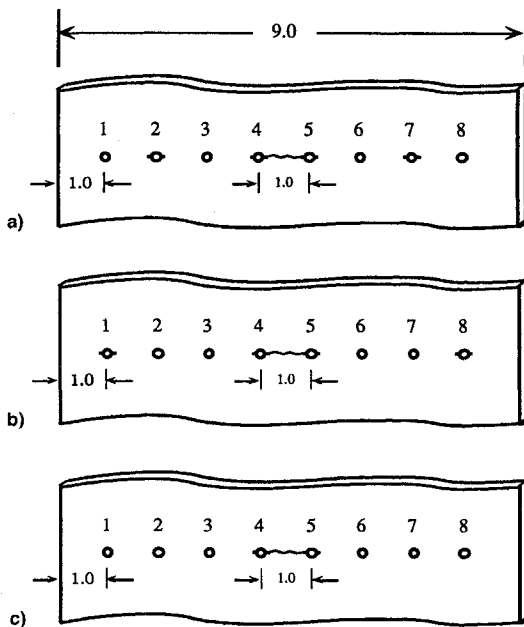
Schematic view of hole spacing and crack configuration for various type B MSD specimens. Nominal hole diameter is 0.16 in. and specimen width is 9.0 in. Specimens a) MSD07 with lead crack and MSD cracks at holes 2 and 7, b) MSD08 with lead crack and MSD cracks at holes 1 and 8, and c) MSD11 with lead crack only (no MSD).
